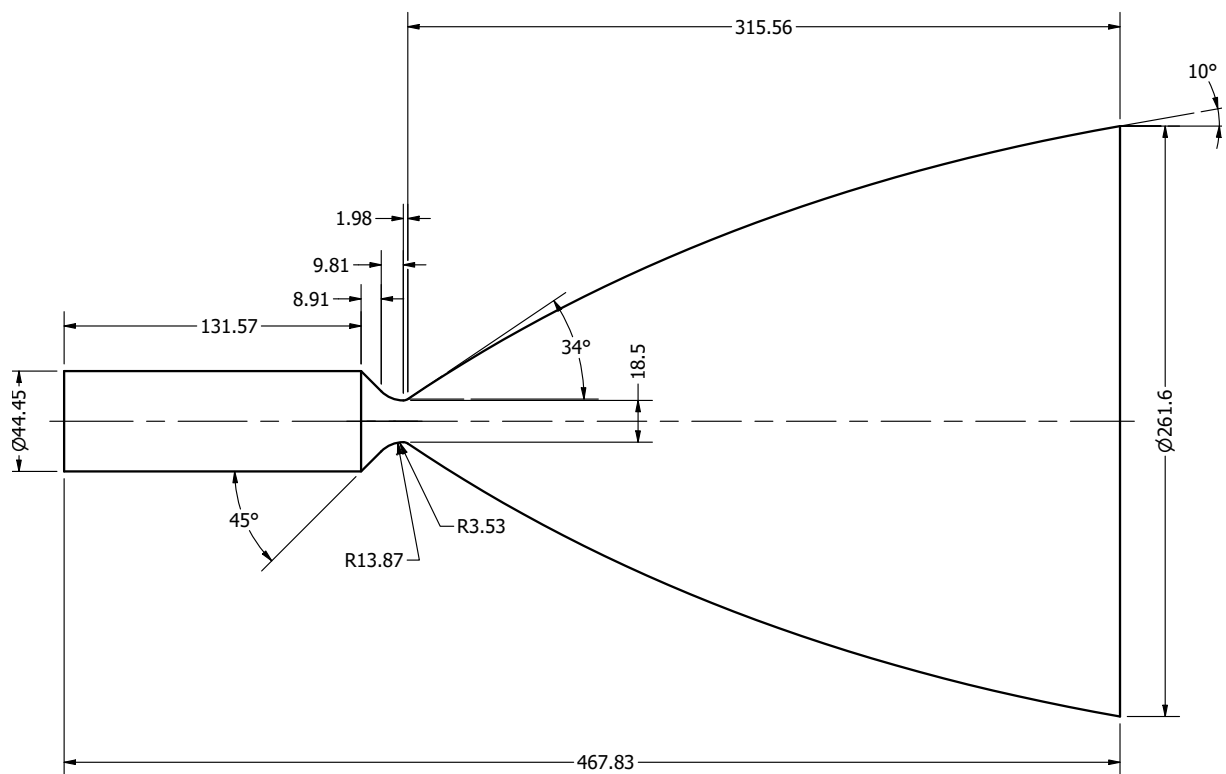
Internal dimensions of the combustion chamber, throat and nozzle for the 500N-thrust engine
